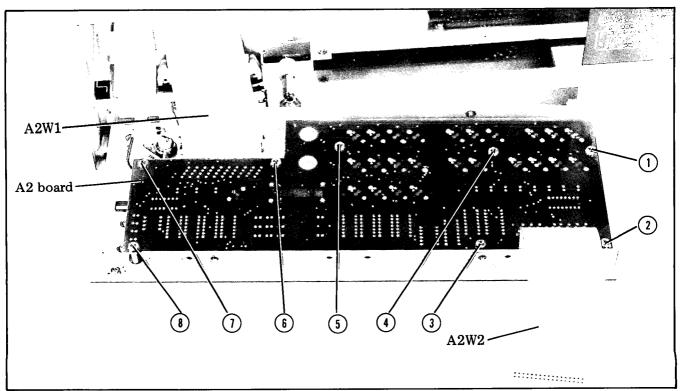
A2 Keyboard and Display Board Disassembly.
